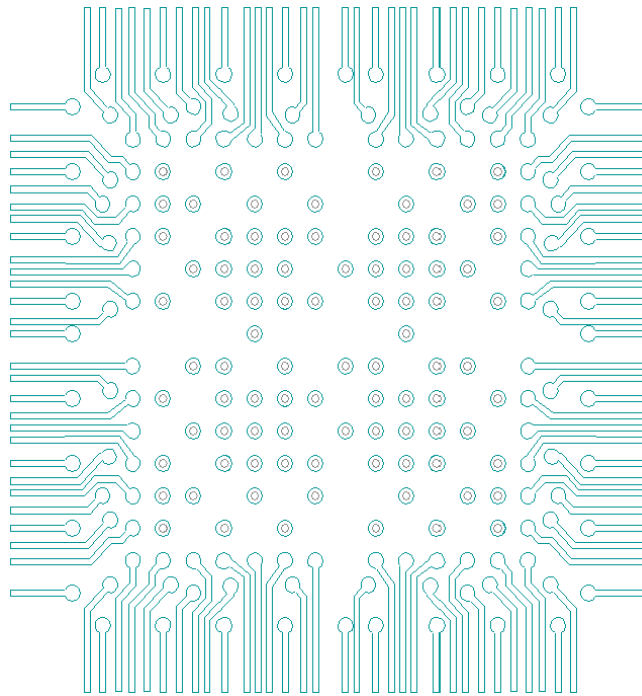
• Suggested Board Layout of Soldered Pads for CS281 CSPs (PCB Lower Layer)
